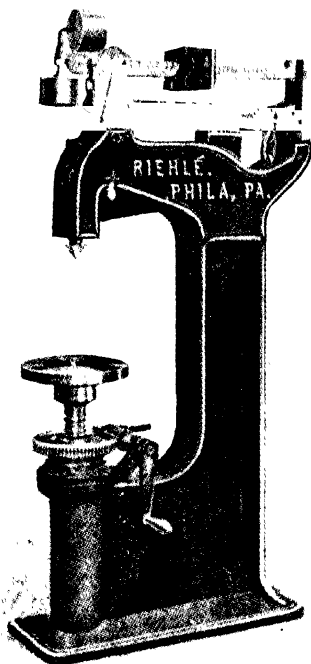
THE RIEHLÉ BRINELL HARDNESS TESTING MACHINE.
